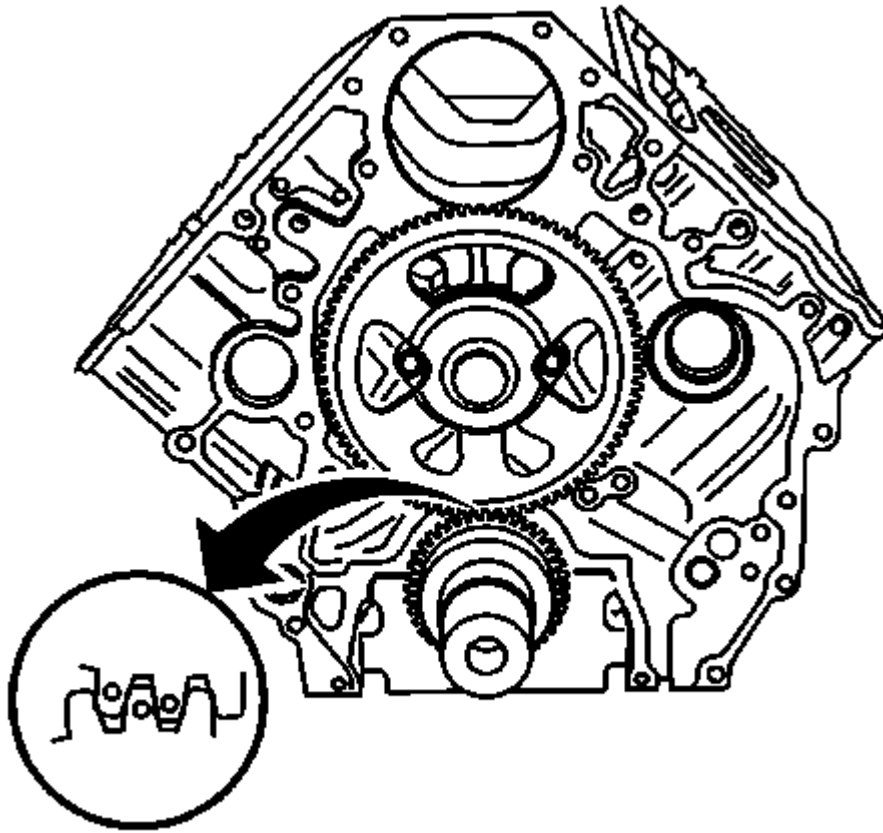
View Of Camshaft Gear Aligned With Crankshaft Gear
